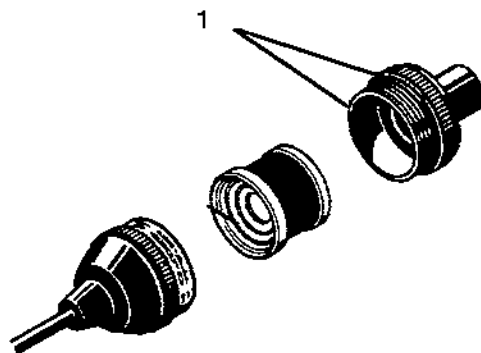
Connecting the front and rear housing of the O₂ sensor cartridge
